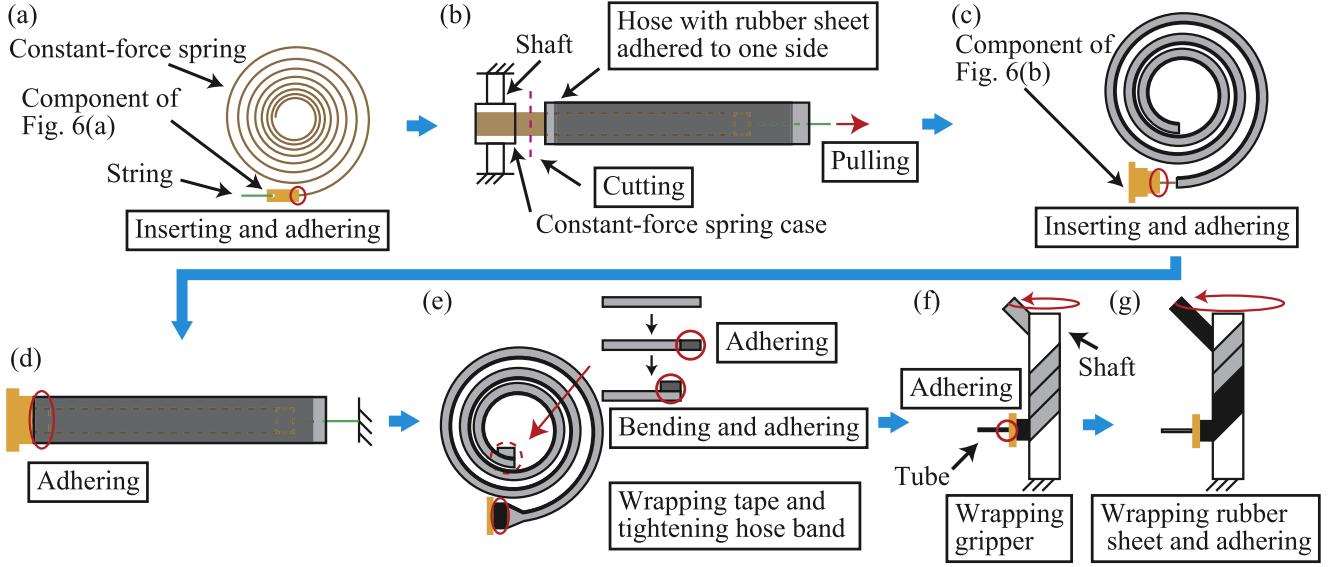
Fabrication process of the prototype. (a) Insert the component in Fig. 5(a) into constant-force spring. (b) Insert the spring into the hose with the rubber sheet adhered. (c) Insert the component in fig. 5(b) into constant-force spring. (d) Extend hose and adhere base. (e) Close both ends. (f) Wrap gripper around shaft. (g) Wrap a rubber sheet around gripper and adhere.
